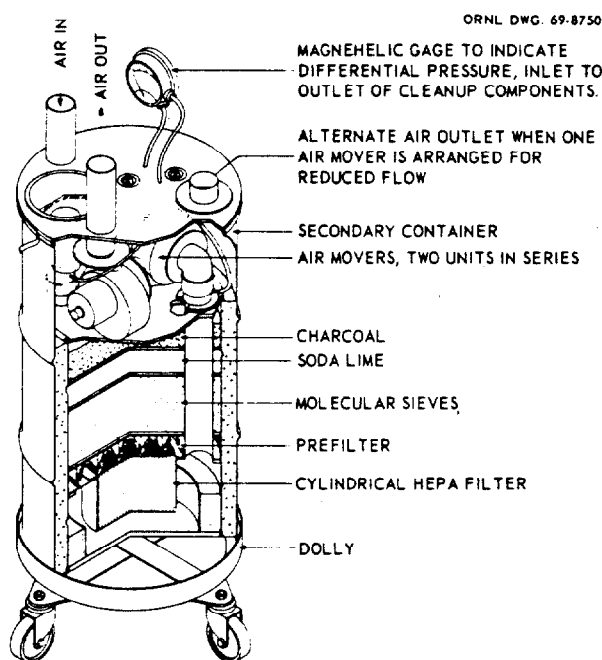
Dry air purifier employing cylindrical HEPA filter.
